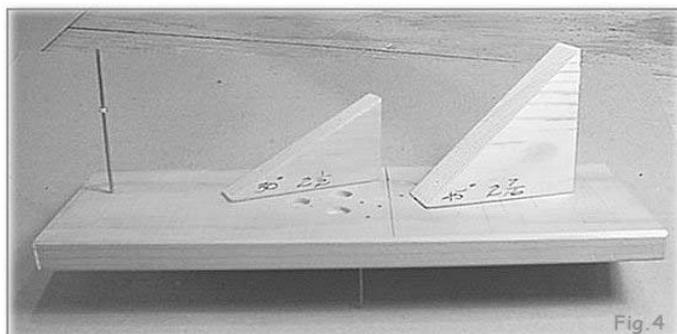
Fixture for drilling hinge angles and setting proper pitch
